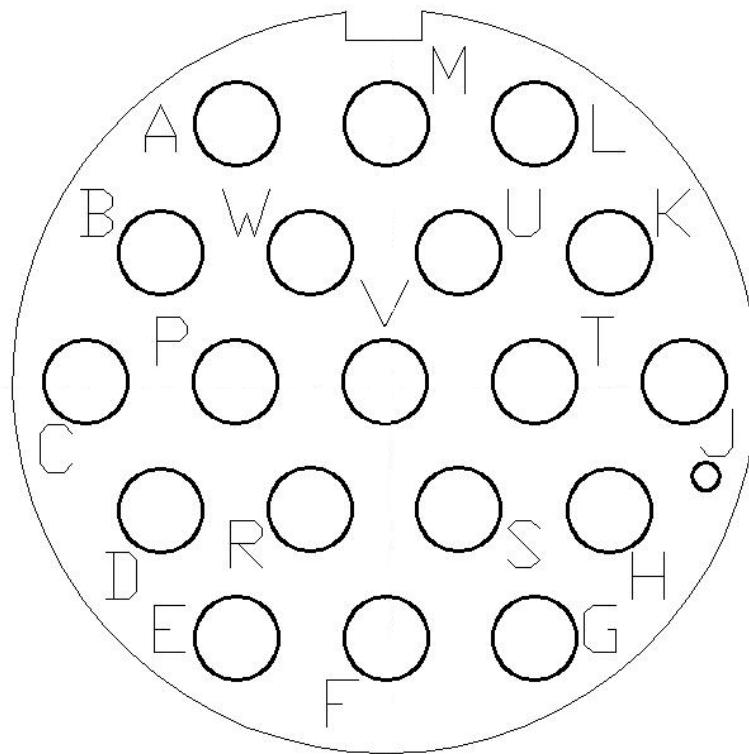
Inverter Box CN3 Connector Layout Drawing
